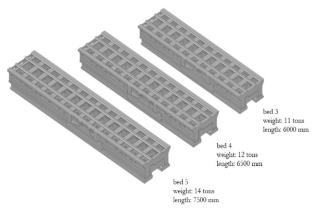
Castings of the bearings that were the subject of the experiment, the material of the castings is EN-G/L-300
